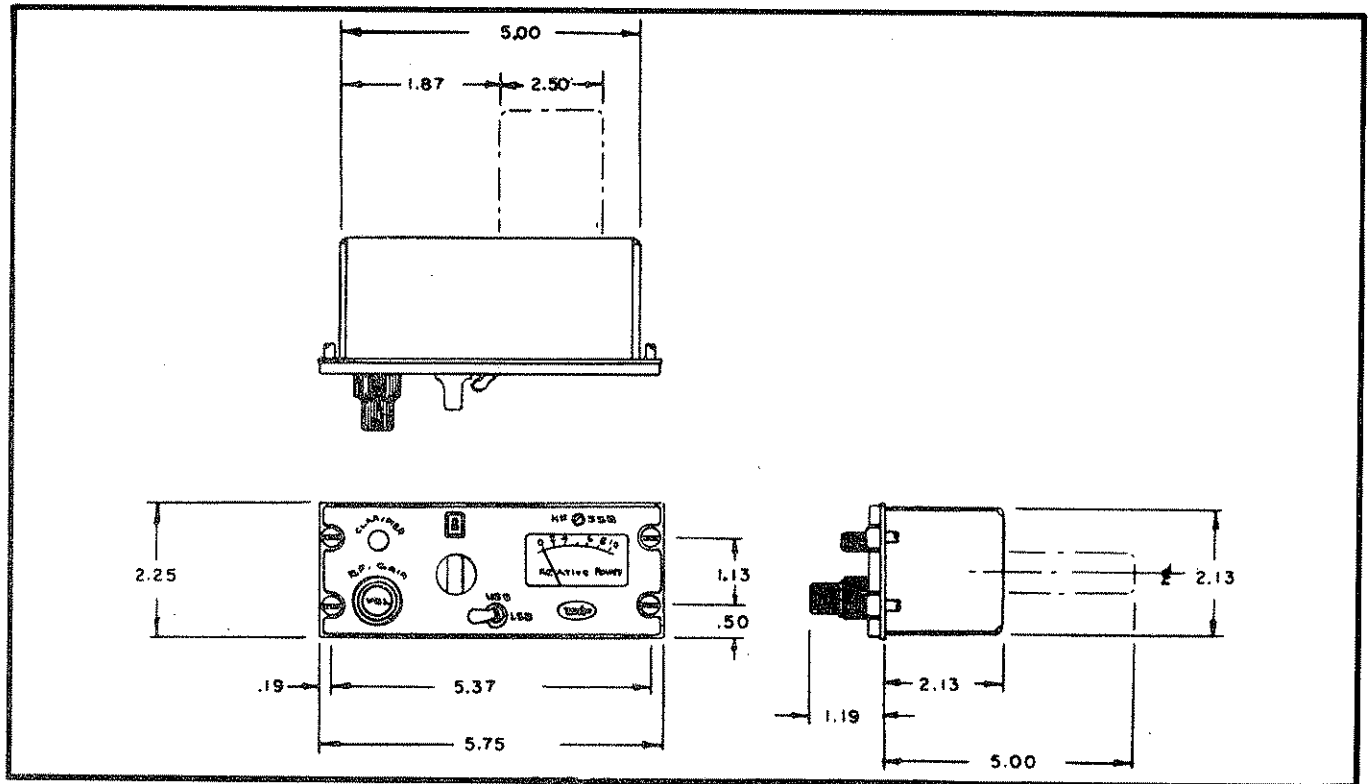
Installation Dimensions, SCU-10 Control Unit
